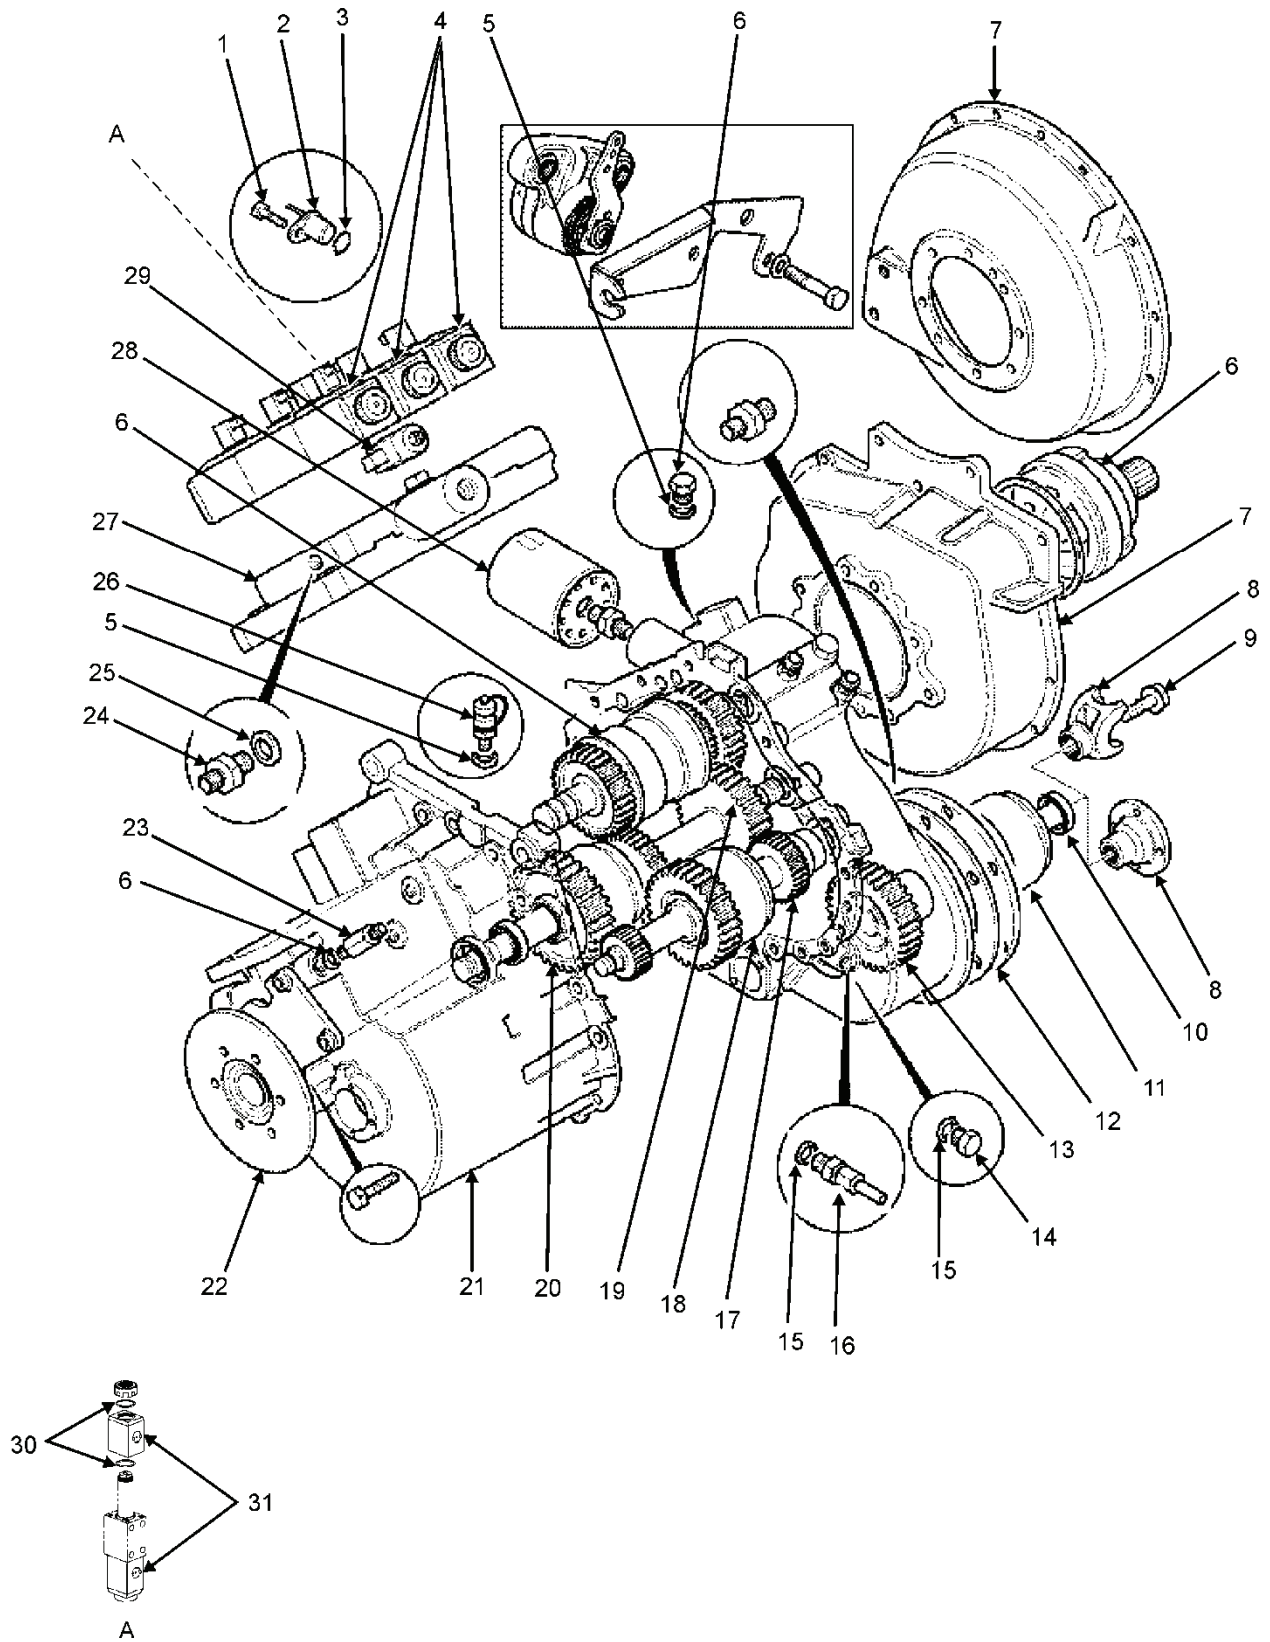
TRANSMISSION GEARBOX ASSEMBLY
